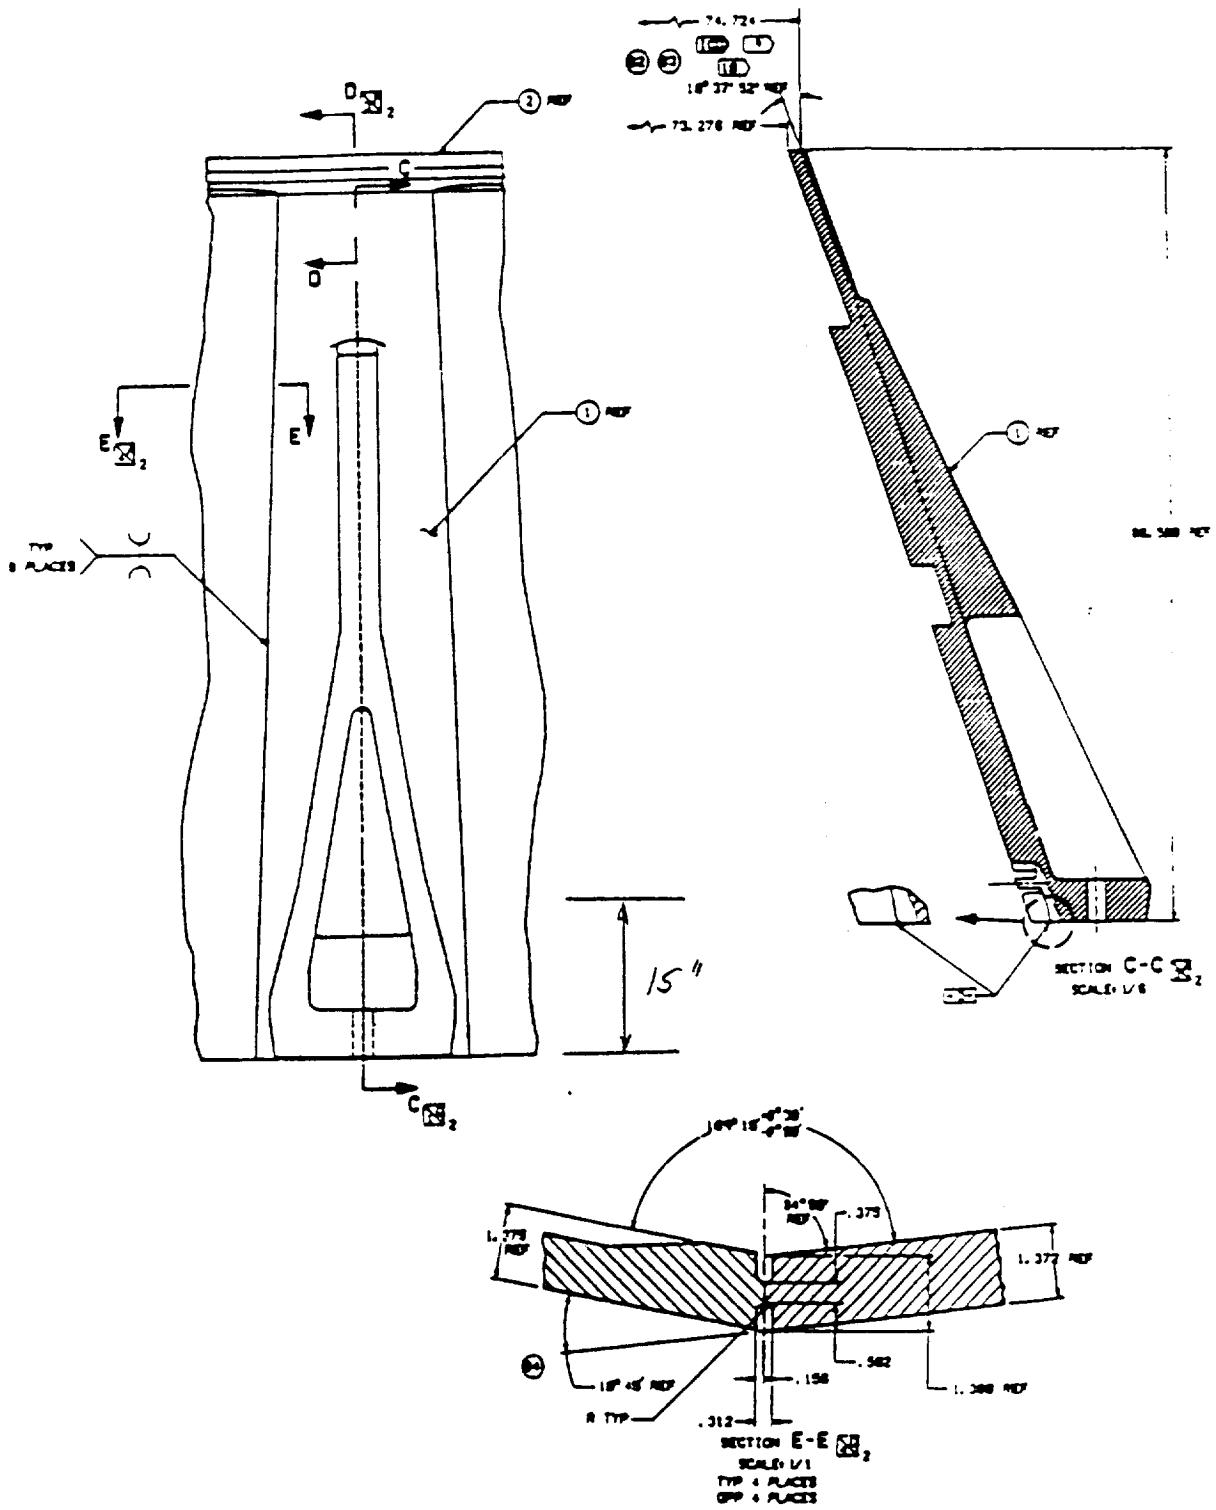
SRB Holddown Post Longitudinal Weld
